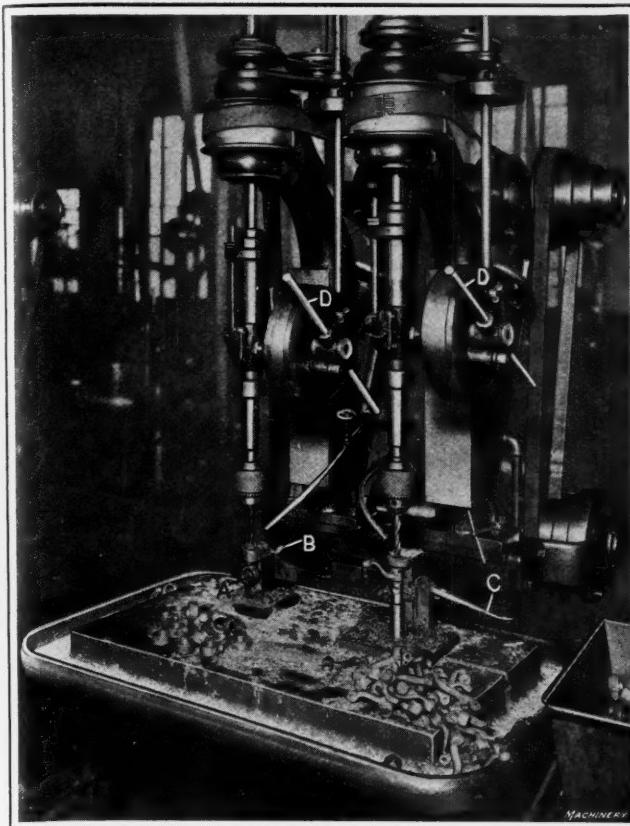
Leland-Gifford Sensitive Drilling Machine equipped with Power Feed which enables One Operator to keep Two Spindles constantly in Operation
